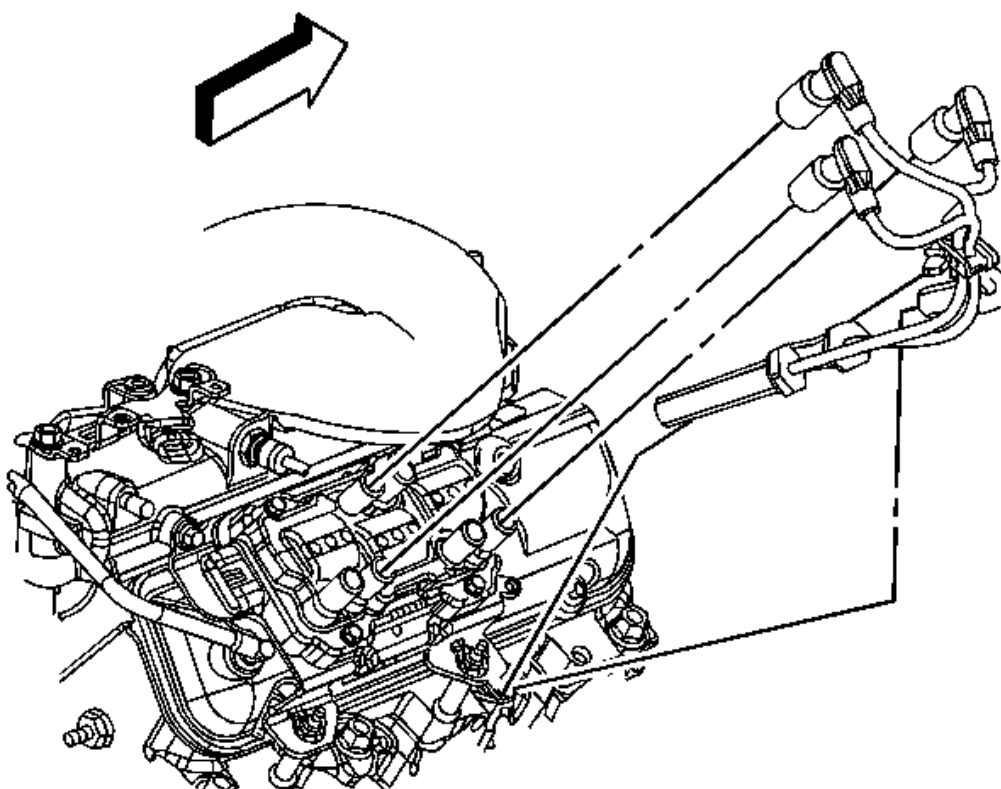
Right Spark Plug WiresCourtesy of GENERAL MOTORS CORP.
